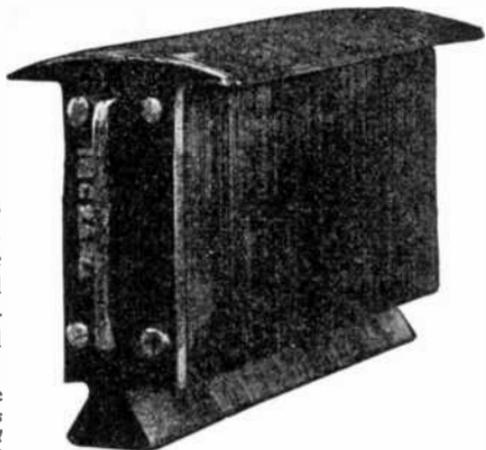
,269.—Wagner laminated pole piece with horns stamped in one piece. The laminations are held together between two end pieces by through rivets, as shown.
